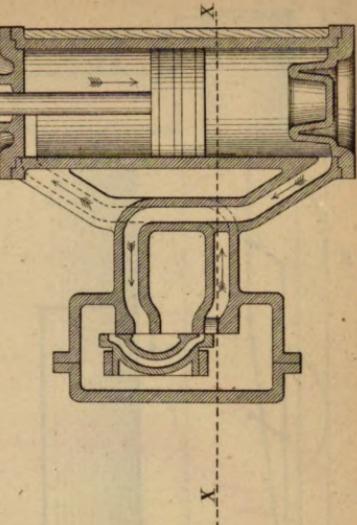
Longitudinal Section of Lower Cylinder and Valve chest.
